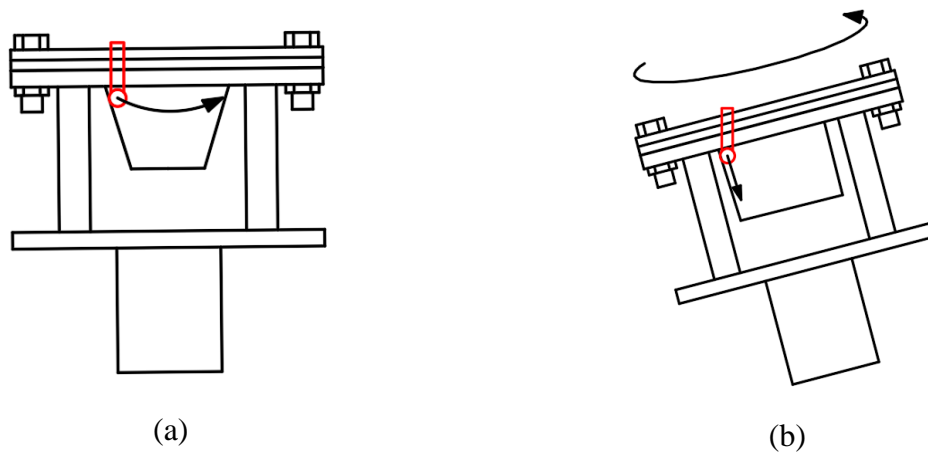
Tool movement (a) without manipulator (b) With manipulator
